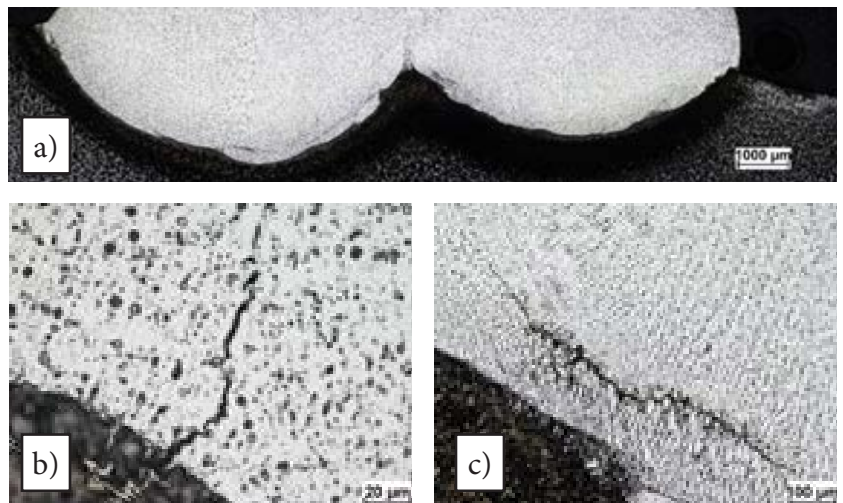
Overlay weld made using the MAG method and a flux-cored wire (process 136, weld deposit ISO 1071 – T C NiFe-2 M) on an element made of grey cast iron: a) fragment of the overlay weld cross-section, mag. 50x; b) microstructure of the fusion zone with the microcrack, mag. 200x; c) microstructure of the fusion zone with the microcrack, mag. 500x.; electrolytic etching
